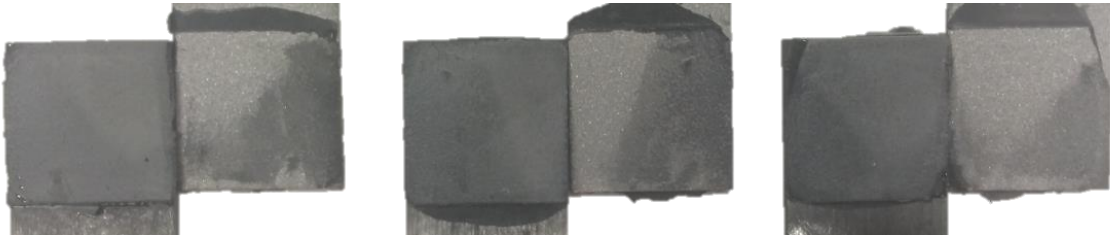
Failure modes of CFRP (2.1 mm)/HSS (1 mm) 25 mm overlap SLJs tested specimens
